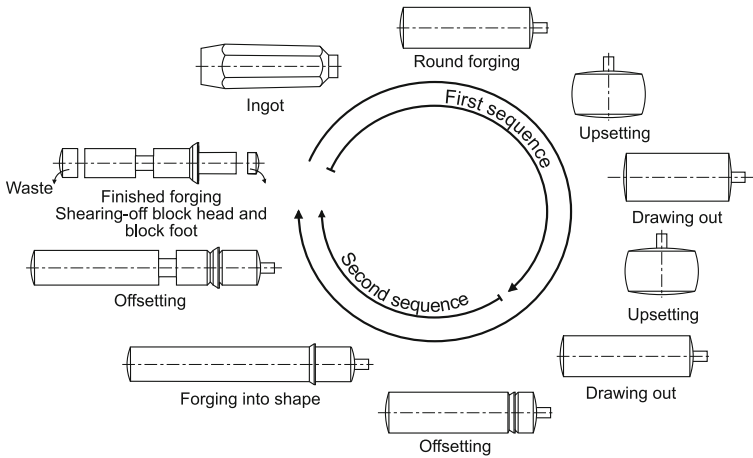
Manufacturing sequence for forging a turbine rotor by upsetting/drawing-out [HALL71]
